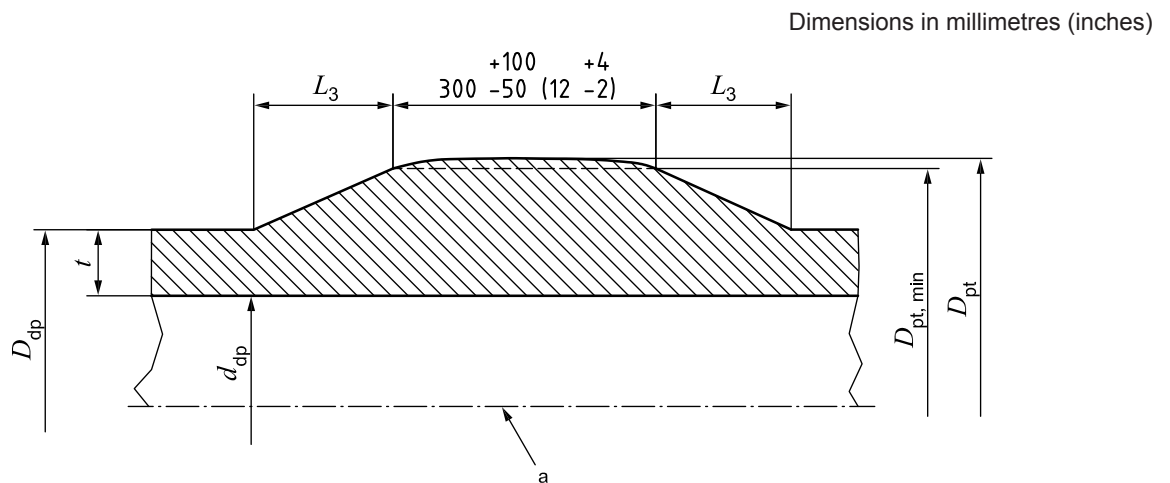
Aluminium alloy drill pipe body end with external upset (see Table 3)
